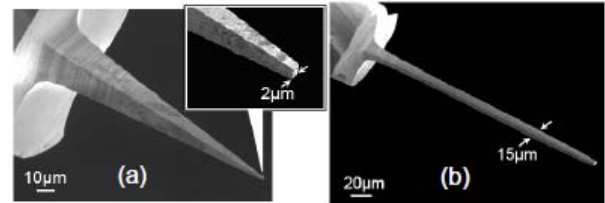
Overviews of produced micro-tools under optimum machining conditions: (a) Ultra precise tool (b) Extremely large aspect ratio micro-tool [10].
